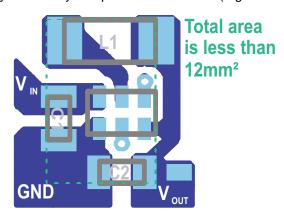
Recommended PCB Layout for TPS6223x-Q1
